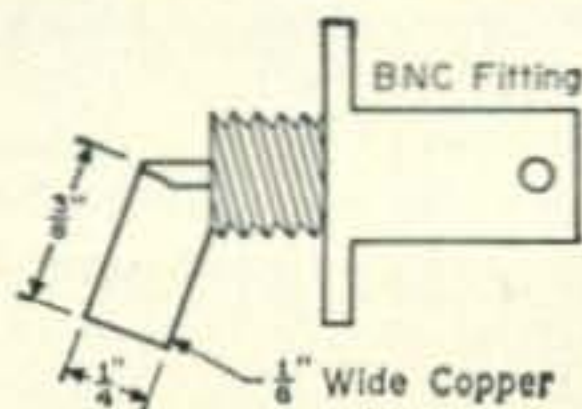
Dimensions of the feedback loop placed in the lower section of the transmitter cavity.
